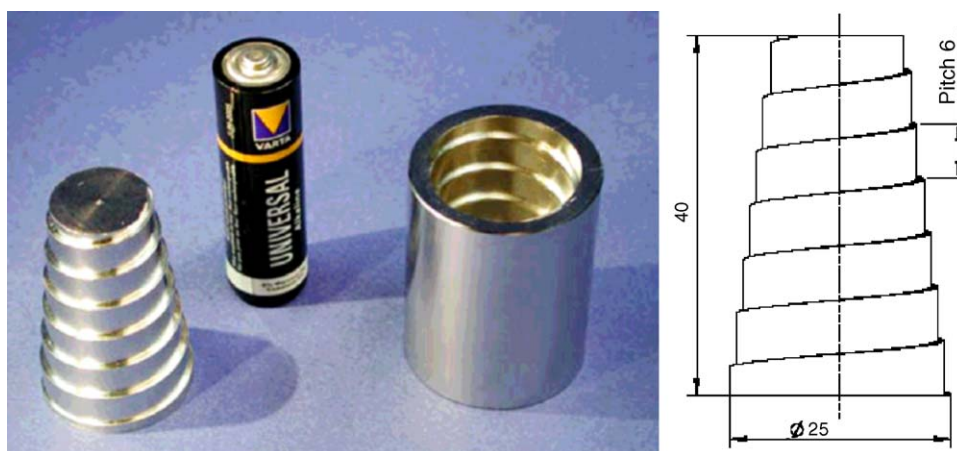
Photograph of the tape cone shaped devices (left) and drawing of the helical guiding on outer and inner geometry (right).
